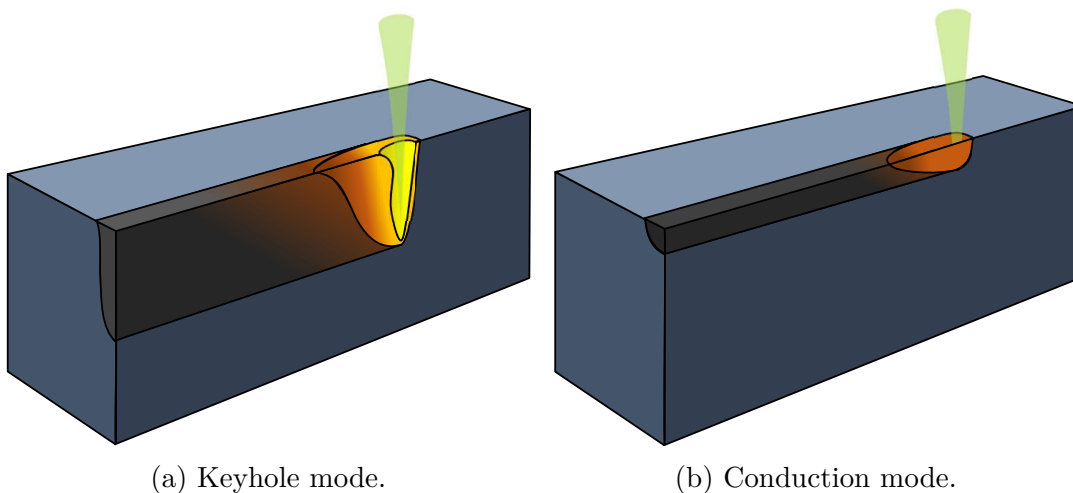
Two welding modes for laser welding. Laser (traversing left to right) green, liquid melt pool orange, keyhole yellow, substrate dark blue, weld track dark grey (adapted from [www.ionix.fi/en/technologies/laser-processing/laser-welding](http://www.ionix.fi/en/technologies/laser-processing/laser-welding), 15/05/2023).
